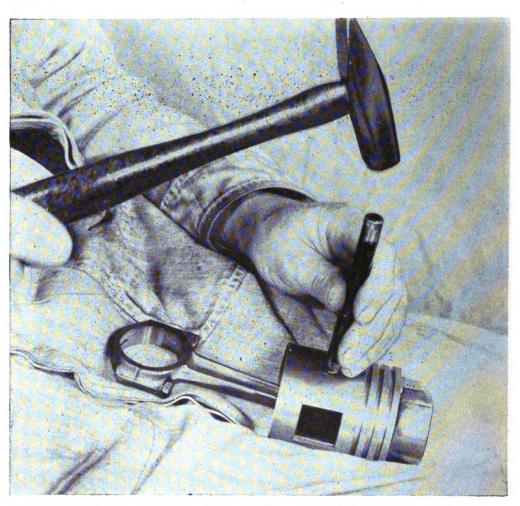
Removing wrist pin from piston, using drive punch and hammer.
